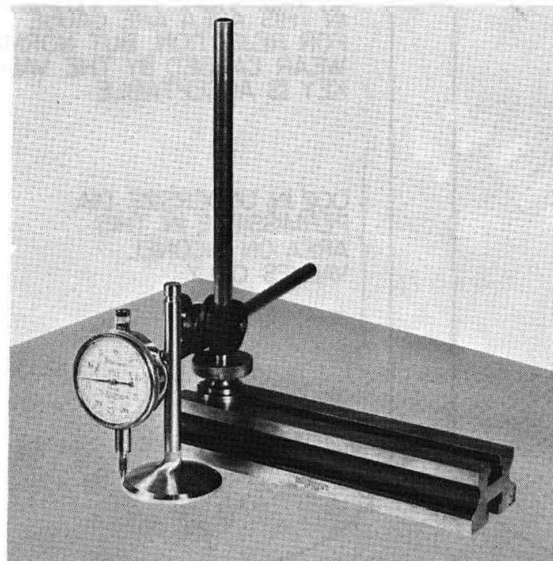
Method of Checking Valve Edge Thickness with Dial Indicator
